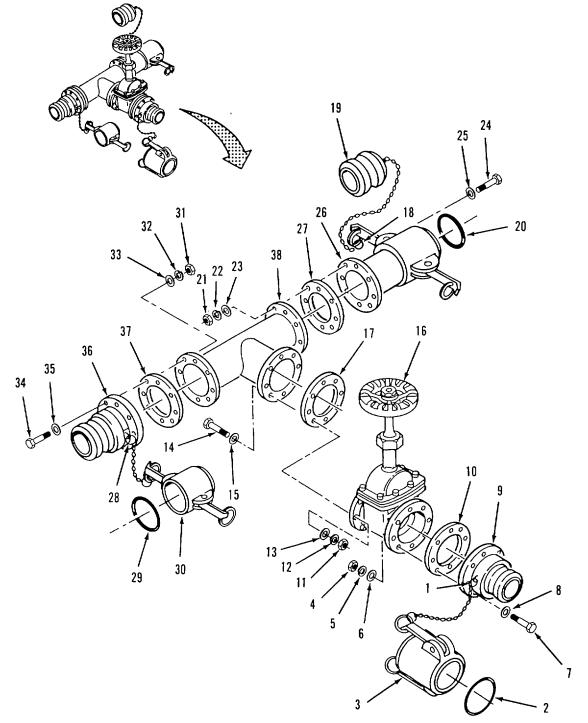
Tee and Gate Valve assembly (9114-Y1) Disassembly.
